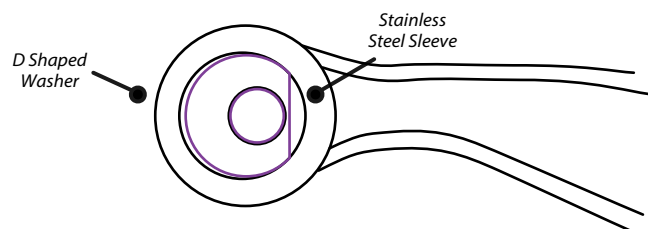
top view showing how the D shaped washer aligns with the stainless steel sleeve. Hold the D-shaped washer in this position as it is tightened.
